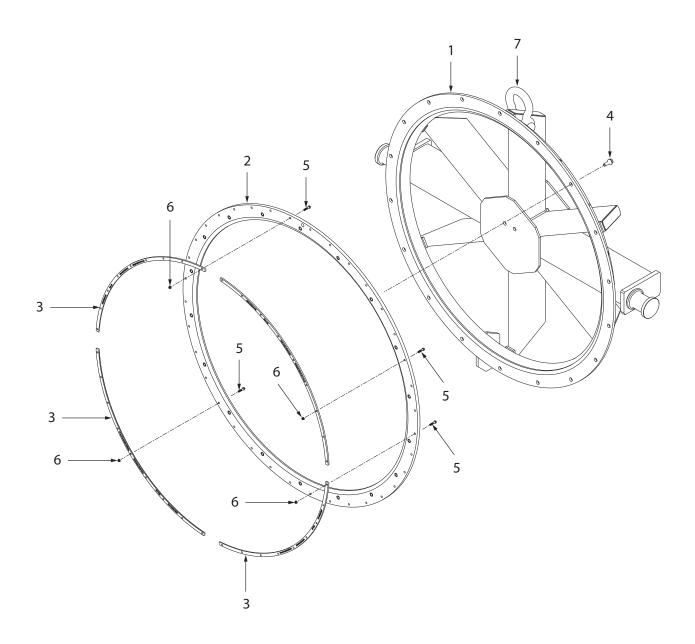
AGSE-E21508-S01 Strong Back Assembly
